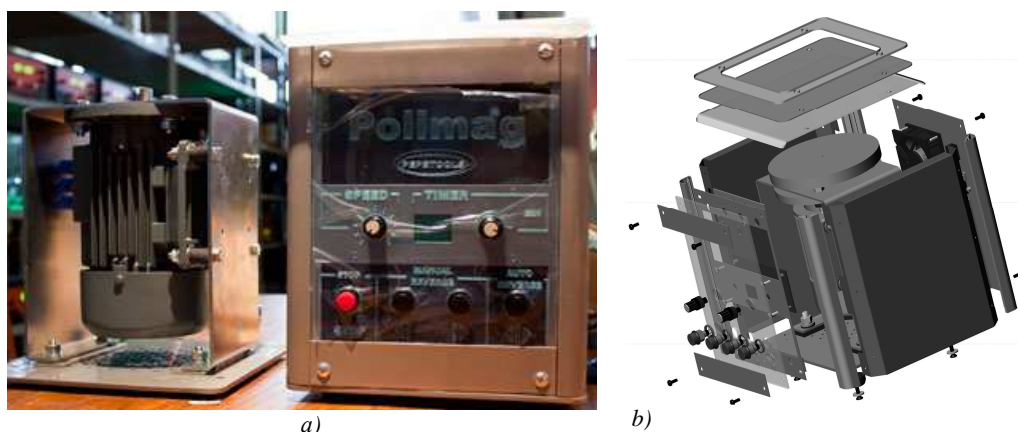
Product “Polimag”: a) photograph; b) three-dimensional model
